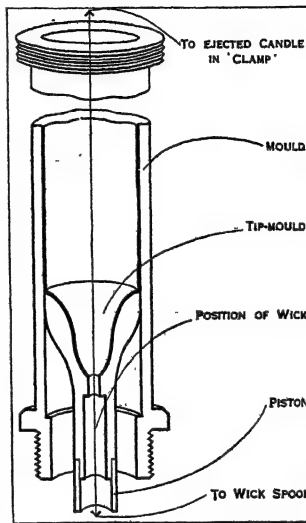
LONGITUDINAL SECTION OF CANDLE MOULD SHOWING PARTS
